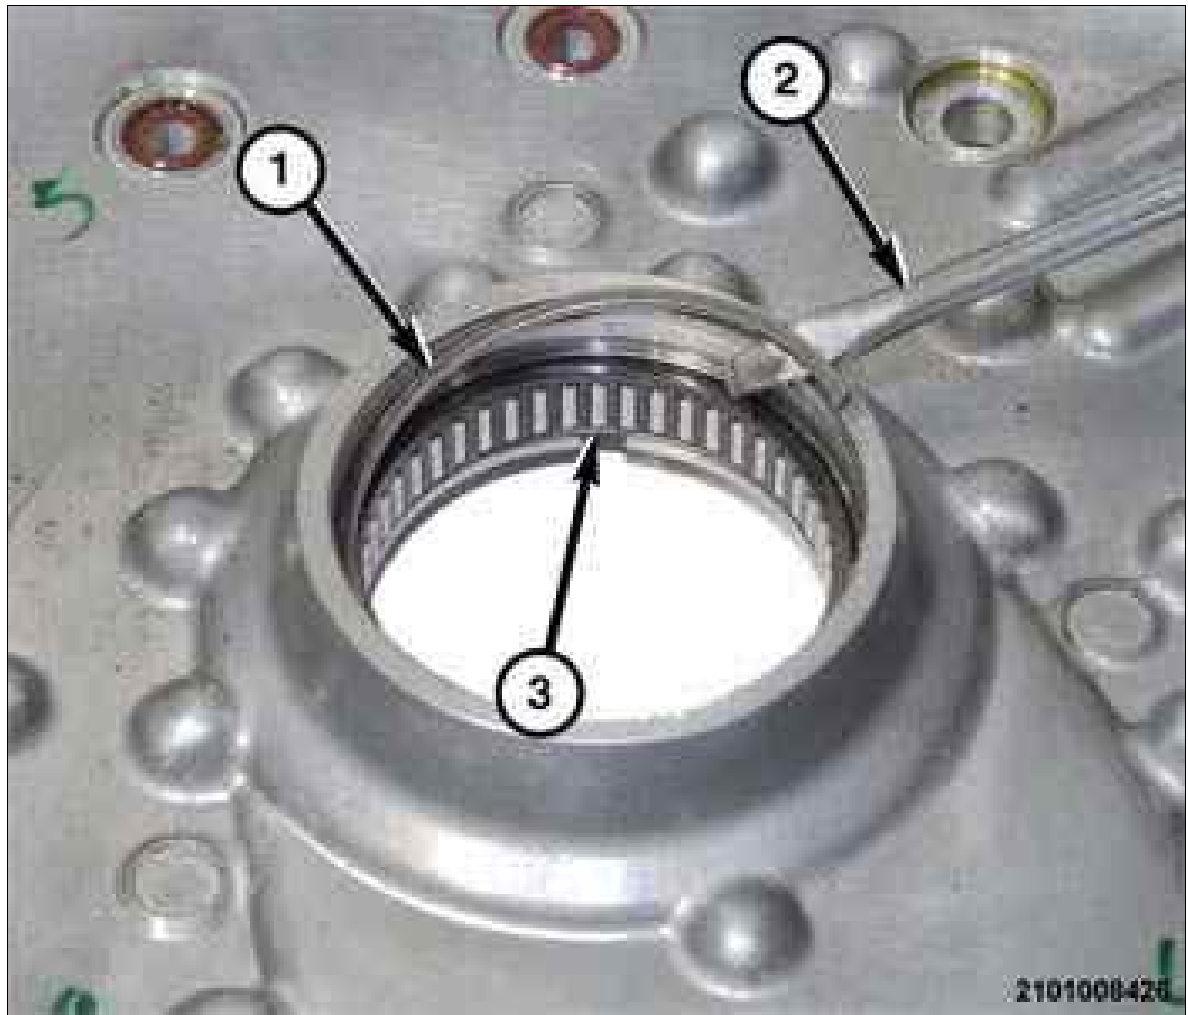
Removing/Installing Intermediate Support Plate And Oil Pump
